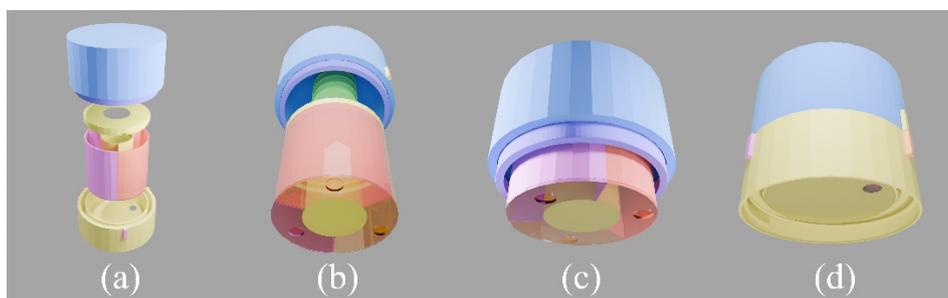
Assembly process of the multi-chamber rotational bottle cap: (a) exploded view of the cap components. (b) sealing the storage module; (c) connecting the knob and the storage module. (d) aligning the insertion interface with the base slot.
